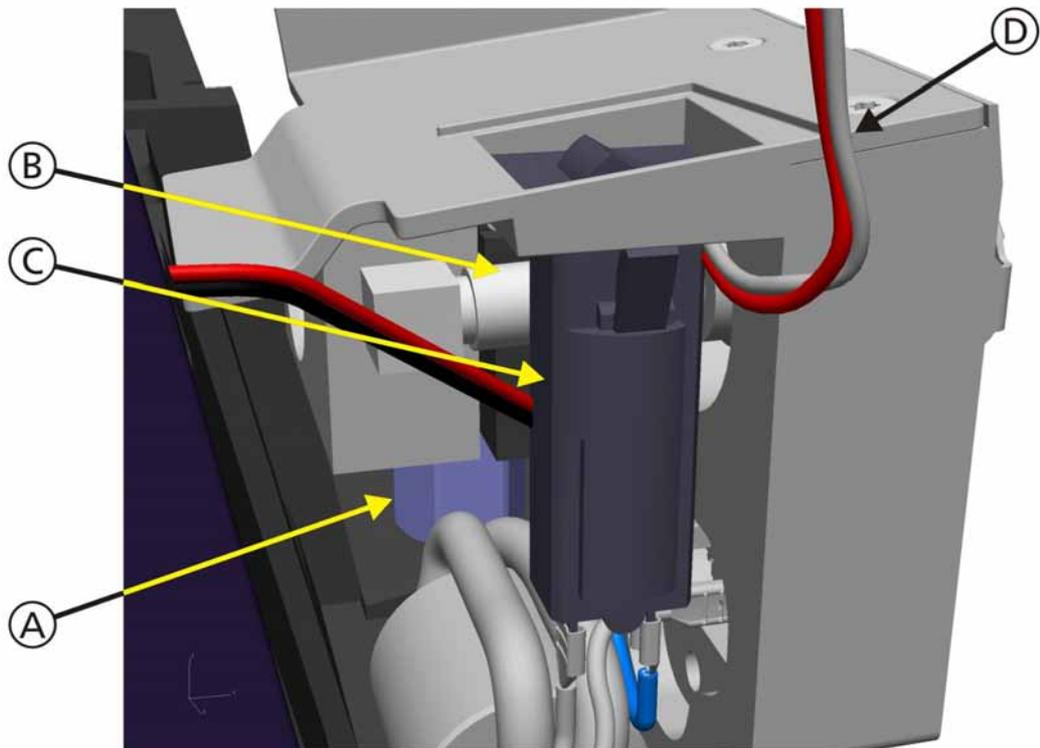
Oxygen Mixer Valve Cable Assembly
